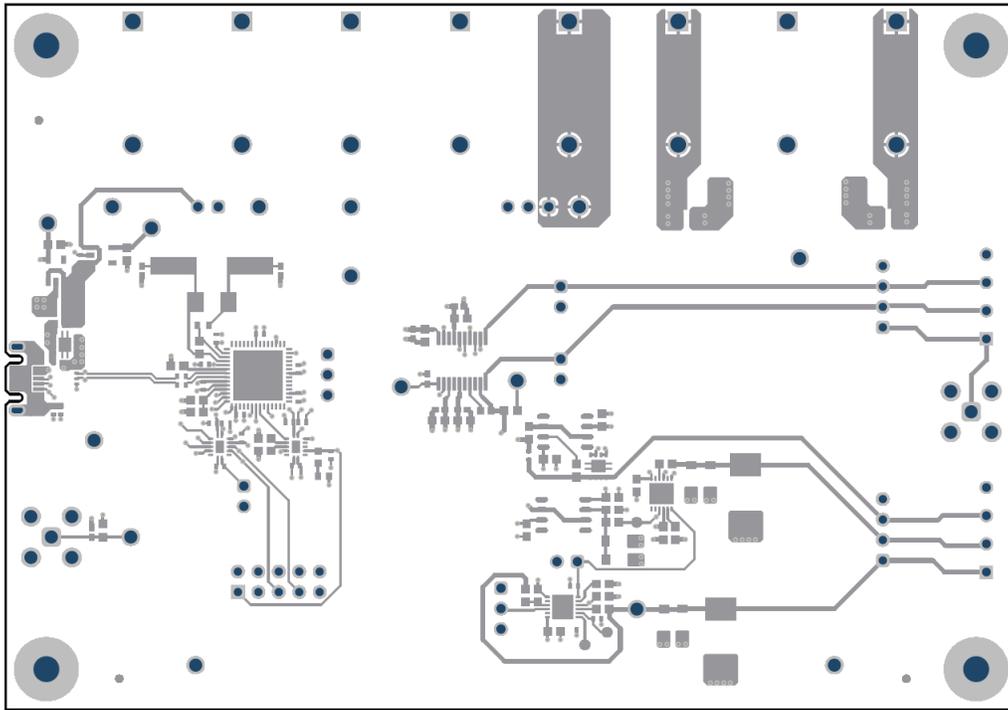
DAC81401EVM PCB Top Layer Layout
